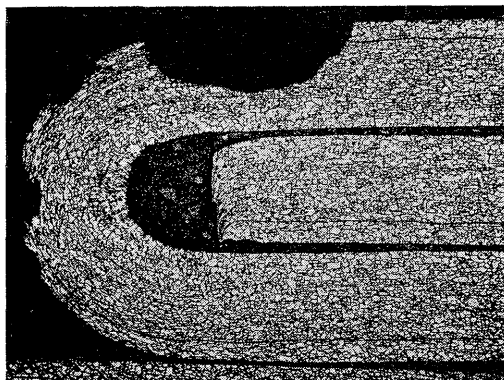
Section of the side seam of a can showing pitting corrosion of the base steel.
